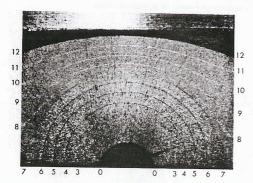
40 x 40 mm specimen. Cracked surface with markings.
